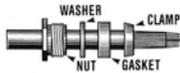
Assembly of the 83 series (SO-239) with hoods. Complete electrical shield integrity in the UHF female connector requires that the shield be attached to the connector flange by means of a hood.
